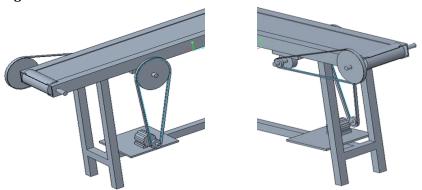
3D Drawing of Motor-Pulley Arrangement
